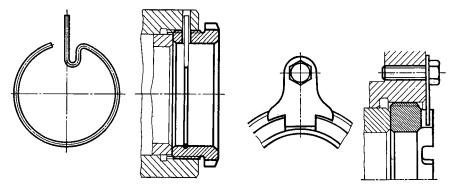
Nut locked by retaining ring Fig. 683. Nut with end-face slots secured with locking plate
